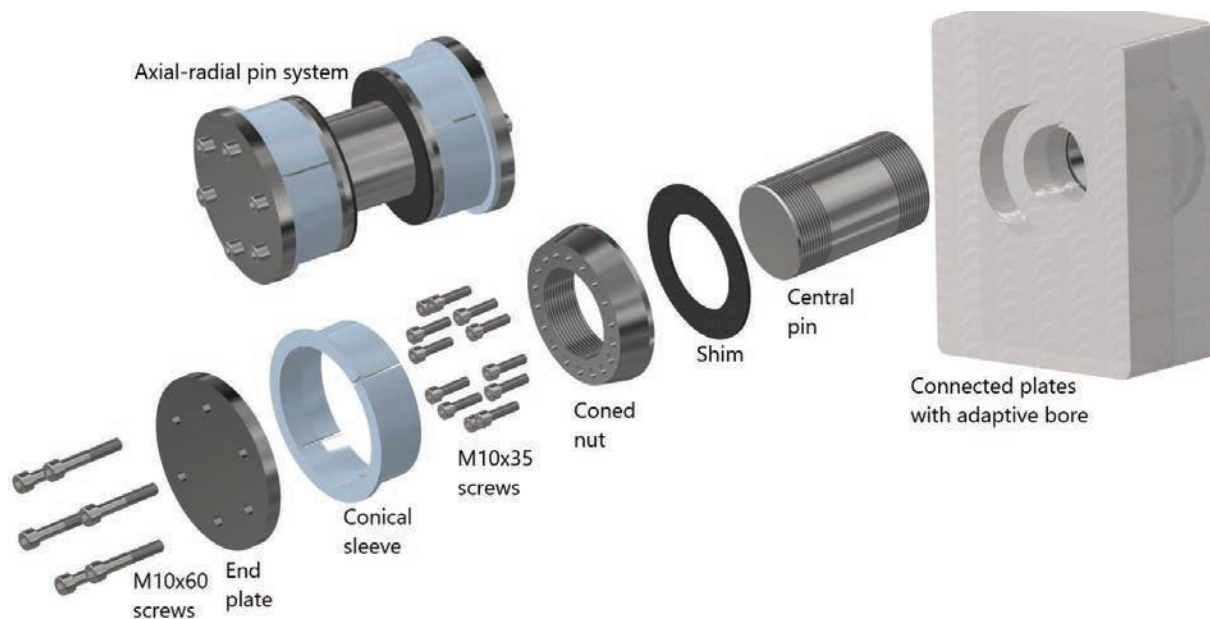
Axial-radial pin system with exploded view and adaptive connecting plates
